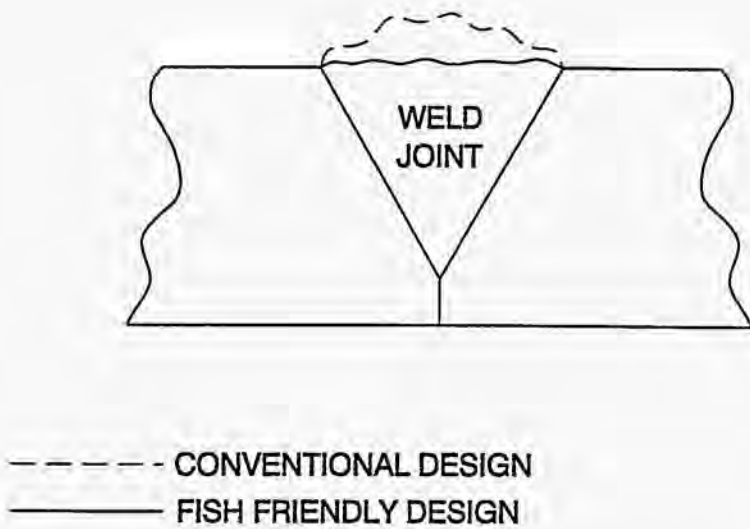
Reduction of Weld Joint Roughness
